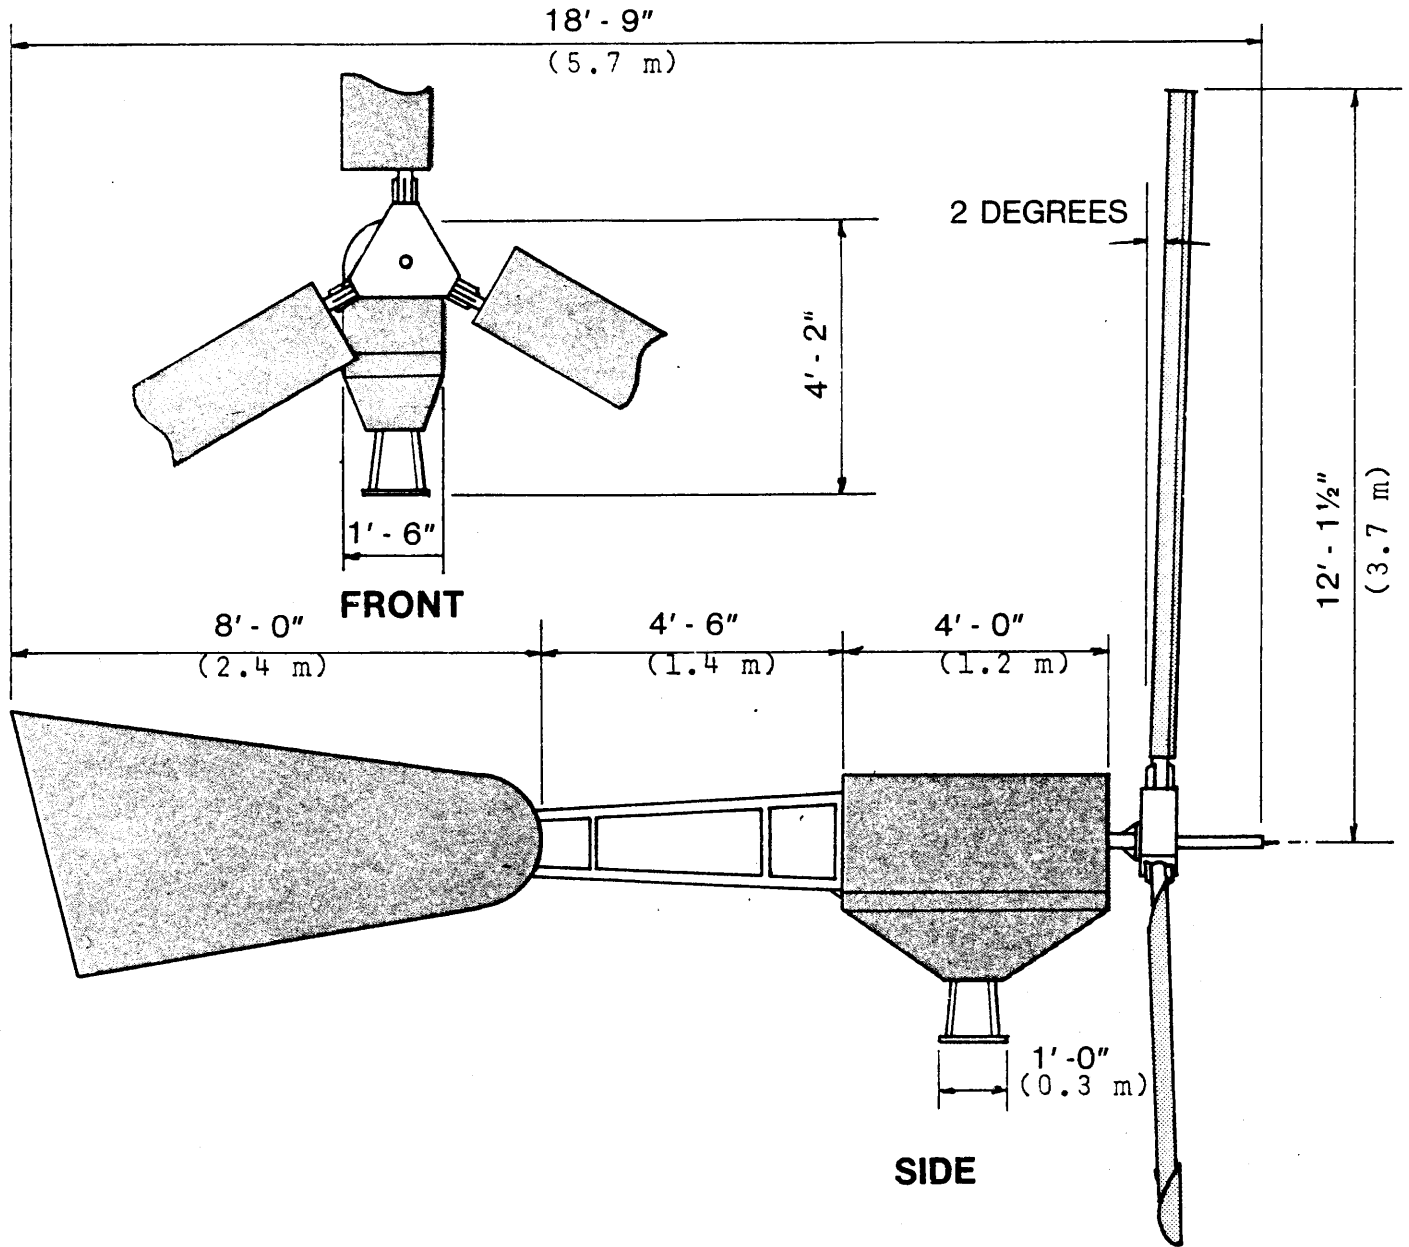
Millville Windmills' 10 kW mill, a horizontal axis, upwind turbine.
